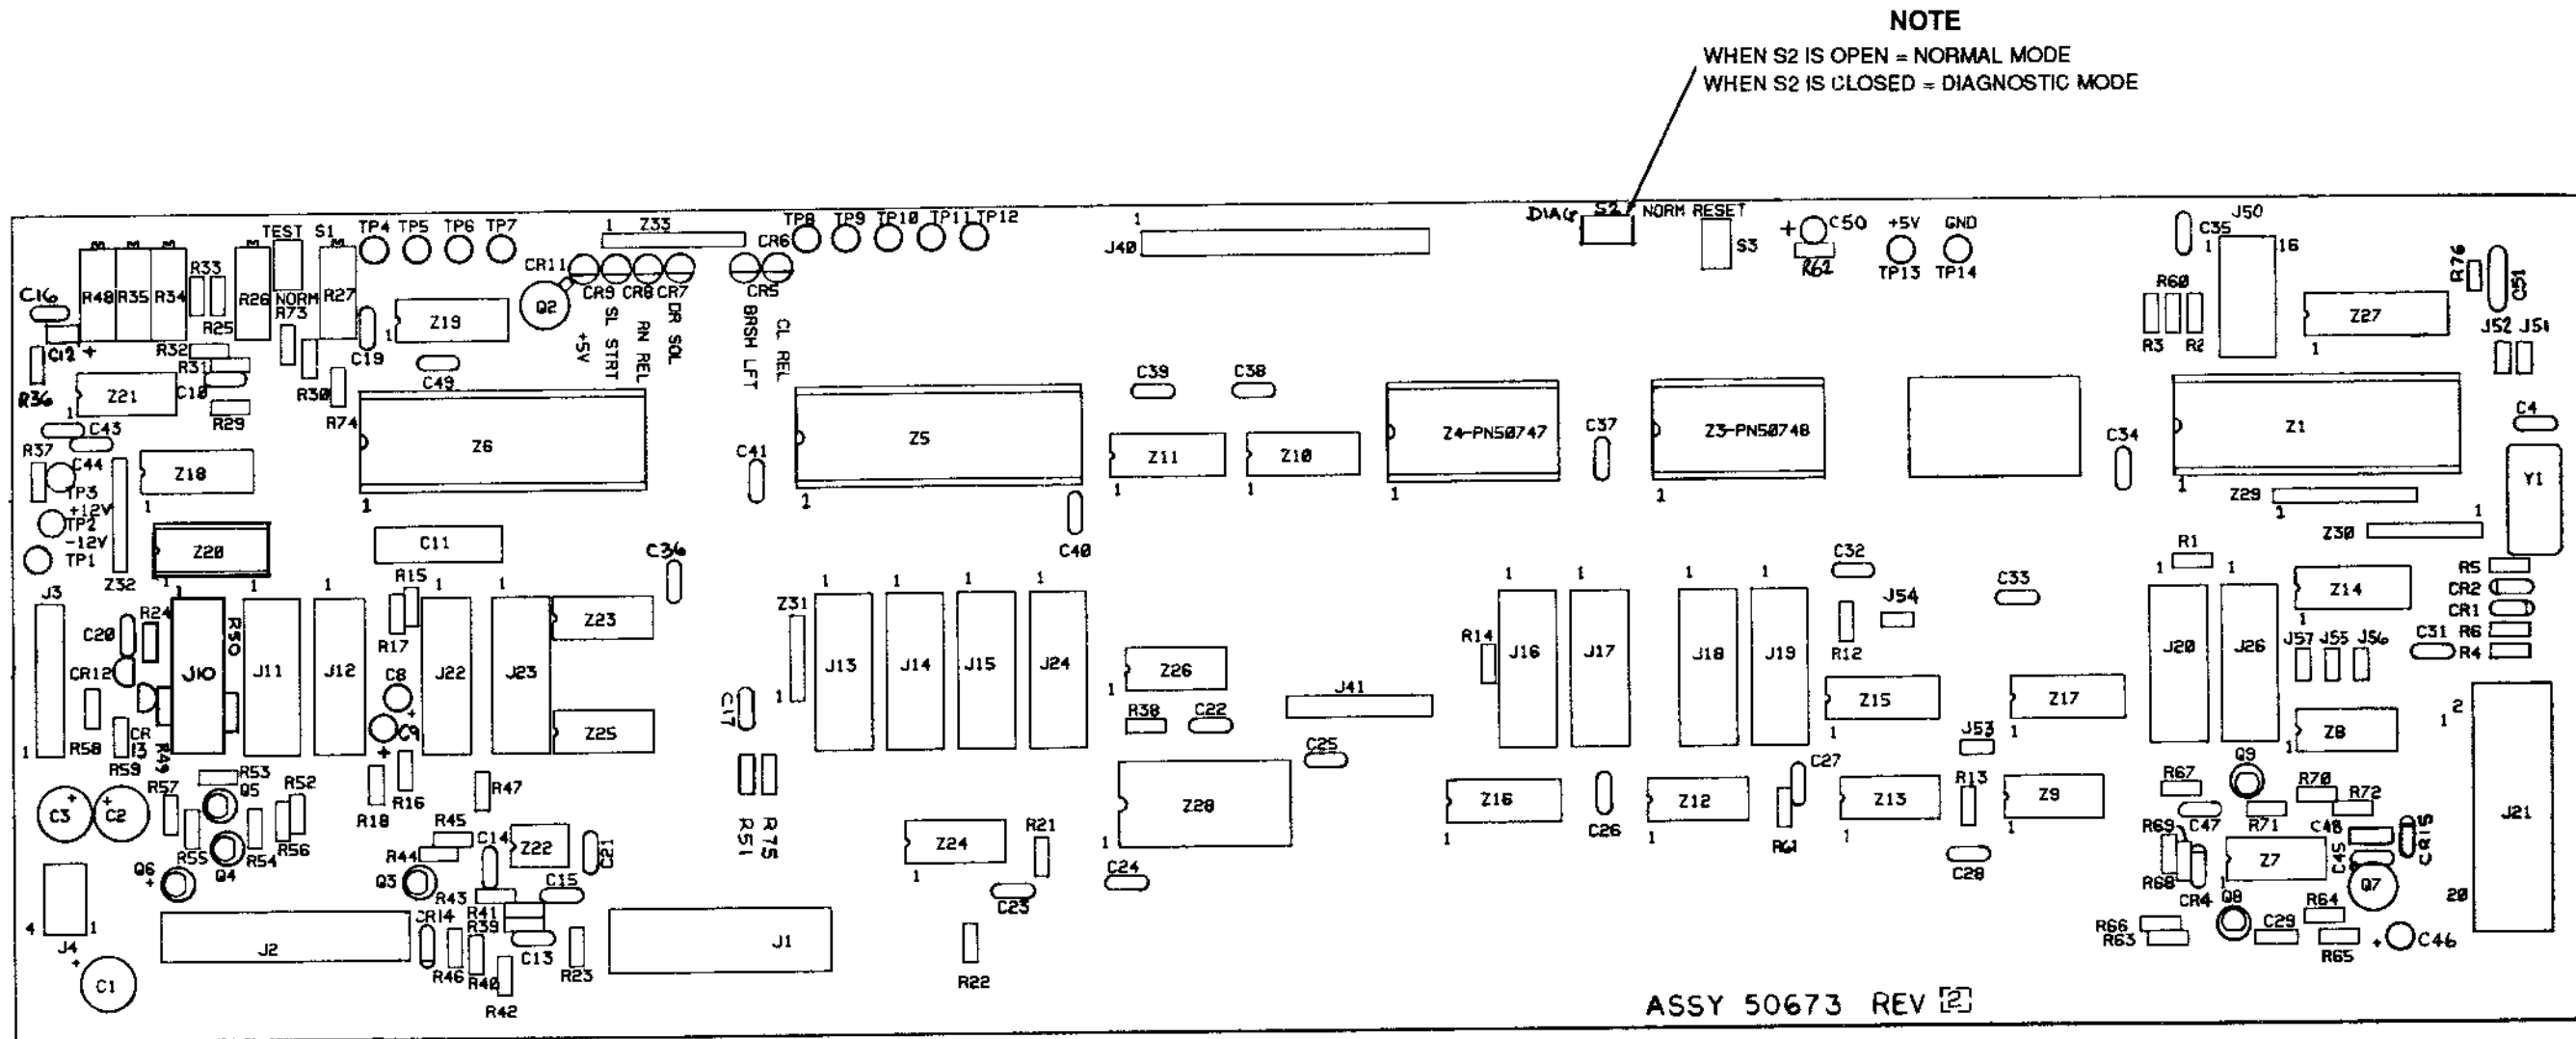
Microcomputer Printed Circuit Board Component Locations, (50673-2)
